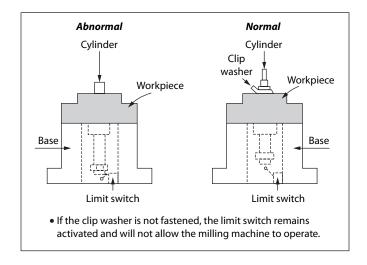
A Safety Poka-Yoke Device for a Milling Machine.
